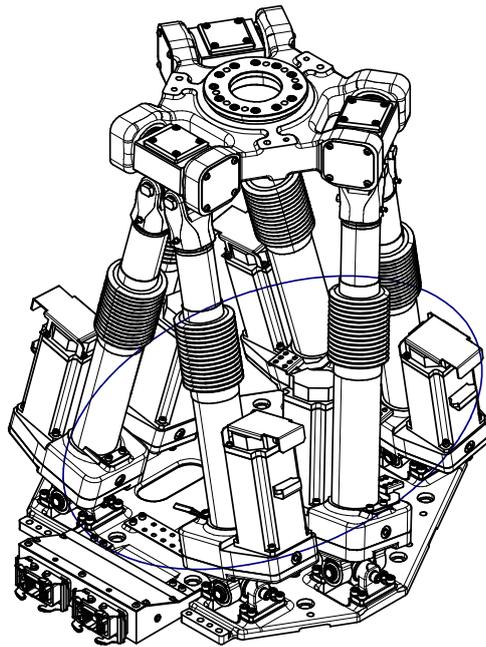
(a) Inspection points of the mechanical unit cables
